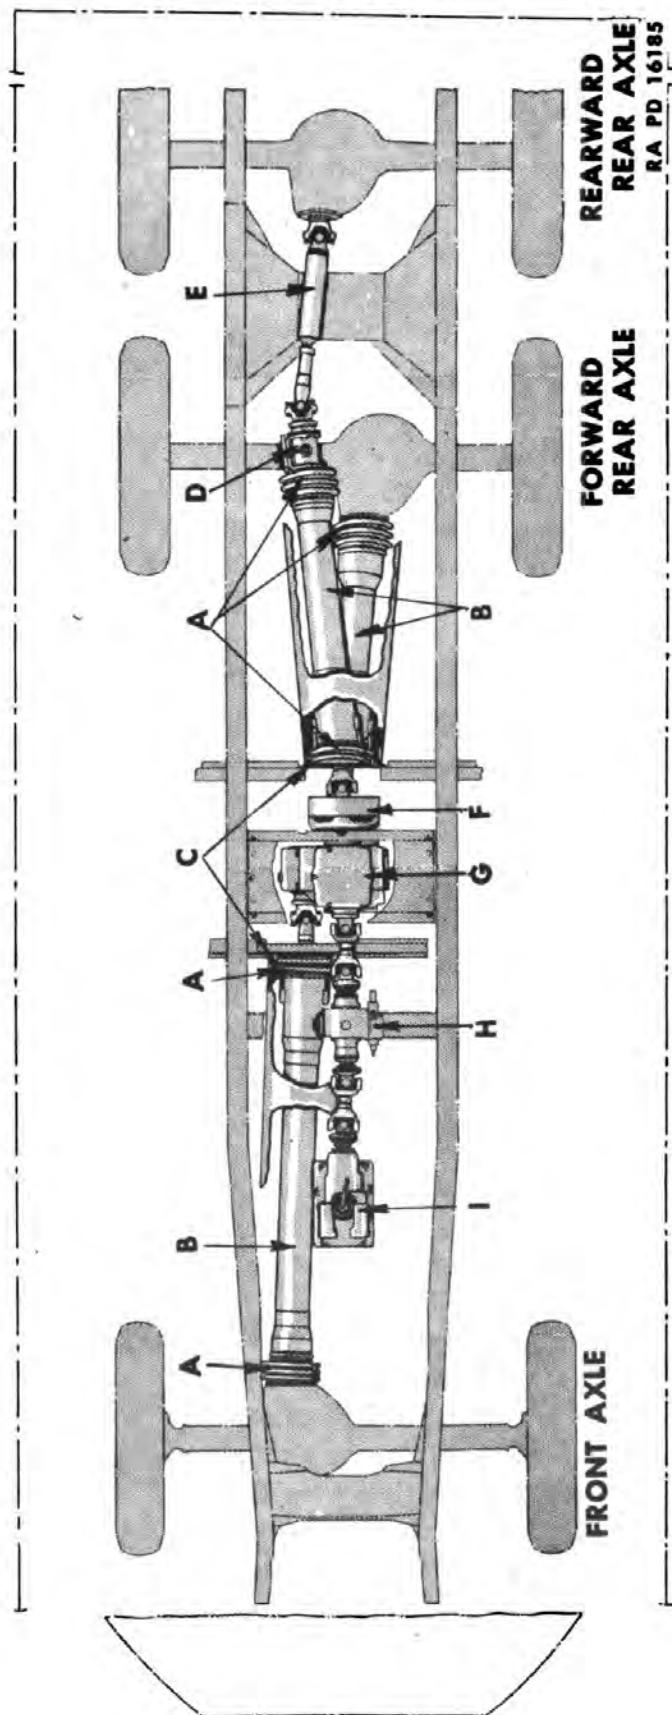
Arrangement of Axle Propeller Shafts and Housing
